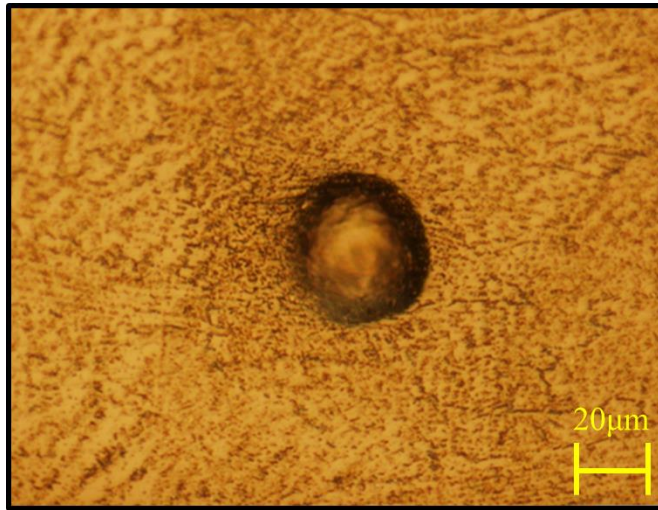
Pore on SLM+EBW sample 18A/B (196.8 J/mm) weld boundary
